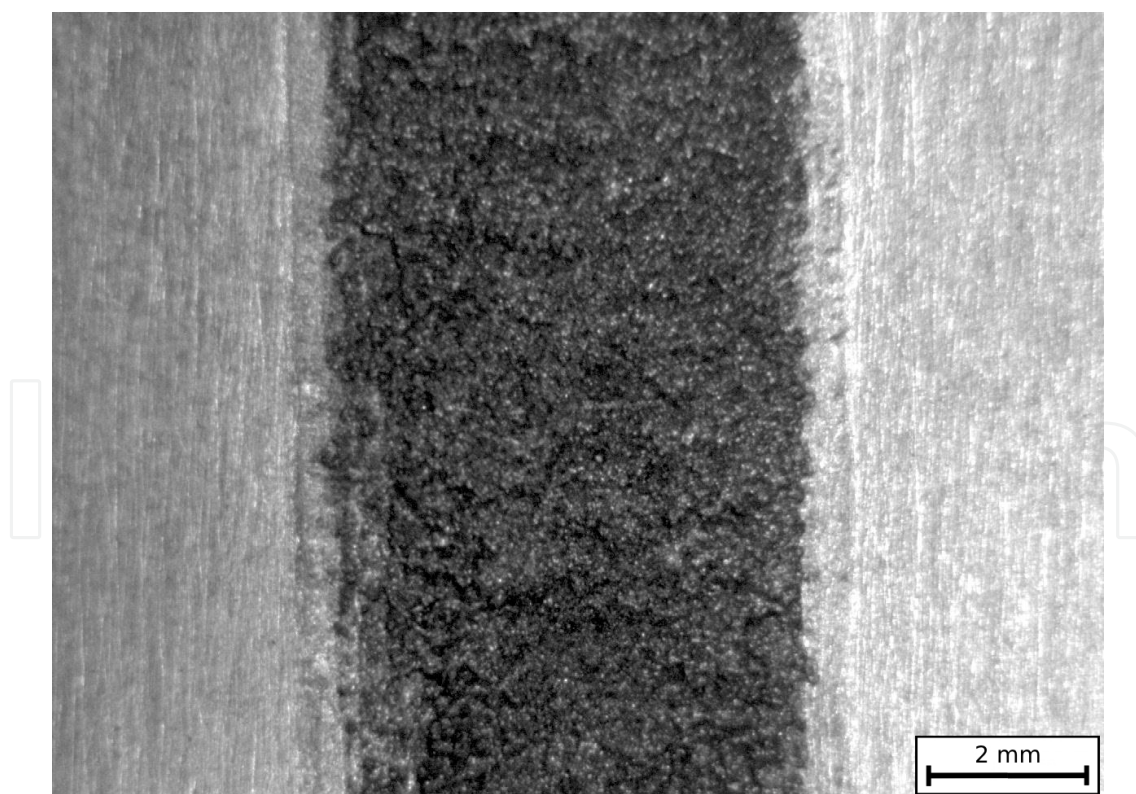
View of the MCMgAl9Zn1 casting magnesium alloy face of weld after laser treatment with SiC, scan rate: 0.75 m/min, laser power: 2.0 kW
